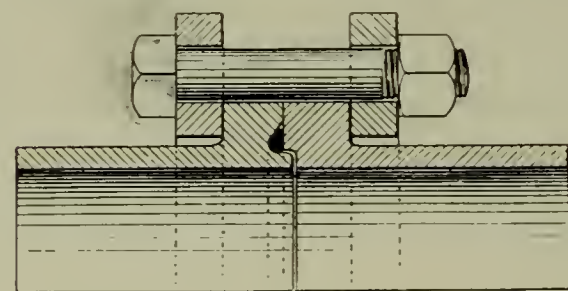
A FLANGE JOINT IN WHICH A HEAVY RING IS WELDED ON THE OUTSIDE OF THE PIPE AT EACH END AND THE RINGS BOLTED TOGETHER
